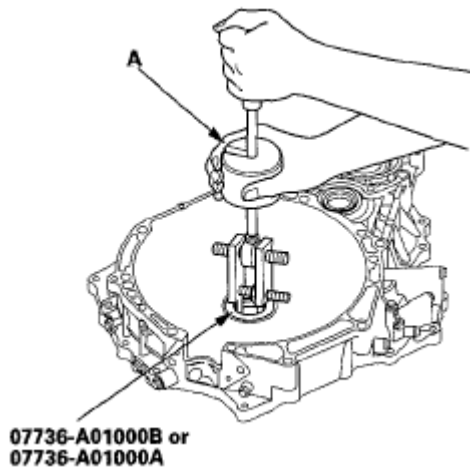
Removing Mainshaft Bearing And Oil Seal
